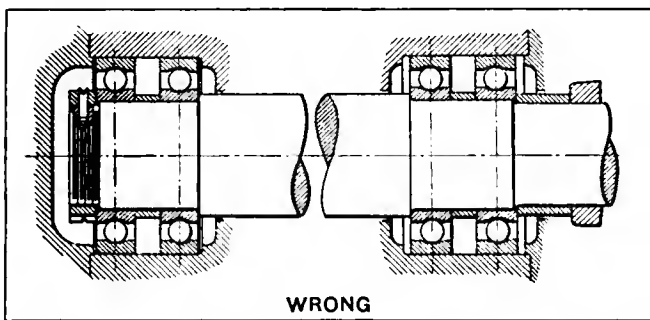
Wrong nesting of ball bearings which support the two ends of a long shaft.
